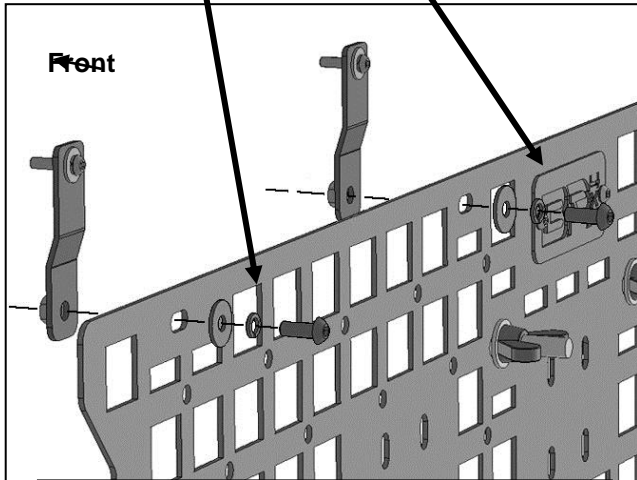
Example of beam style recovery jack attachment to Carriage Bolts in Panel (arrows)
